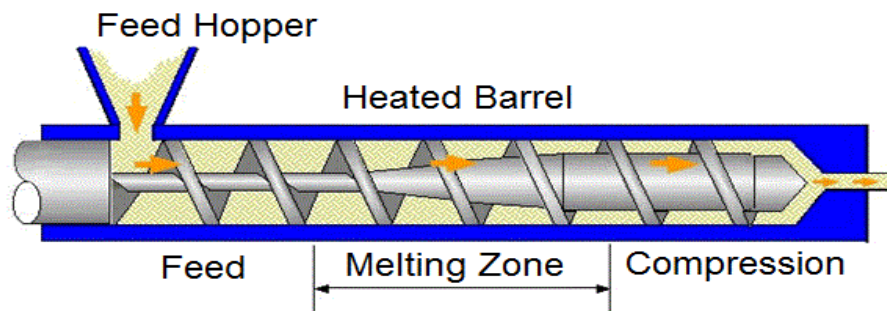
Single screw polymer extruder. Showing three main sections: feed zone, melting zone, and compression zone.
